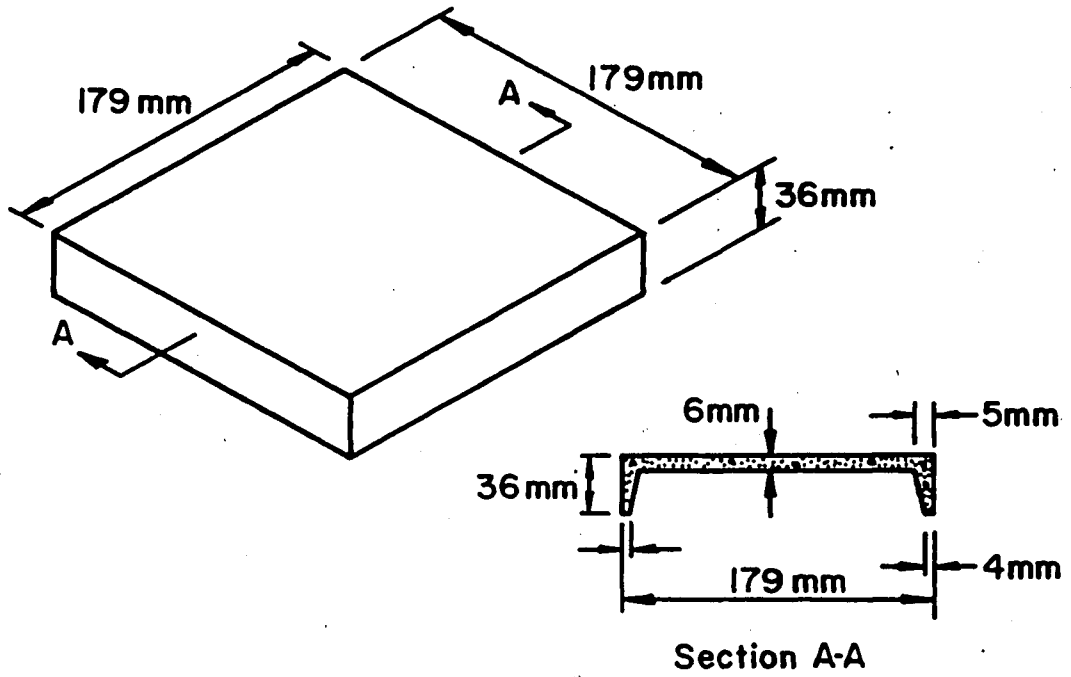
Isometric View And Dimensions Of A Fill Box
